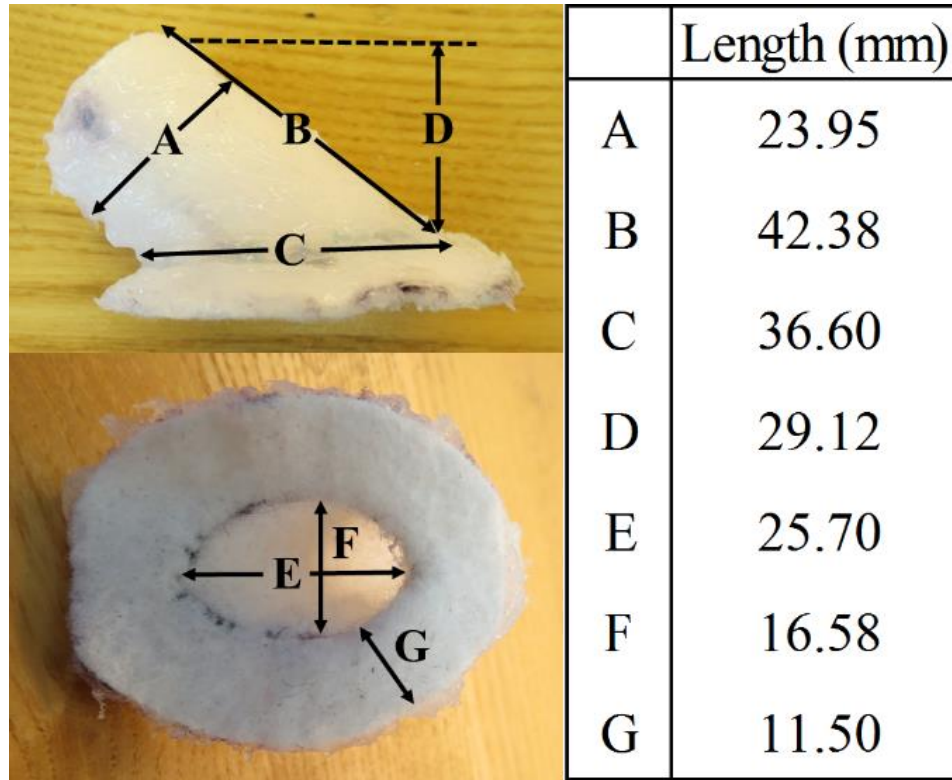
Dimensions of the prototype flanged cuff used for experimentation.
